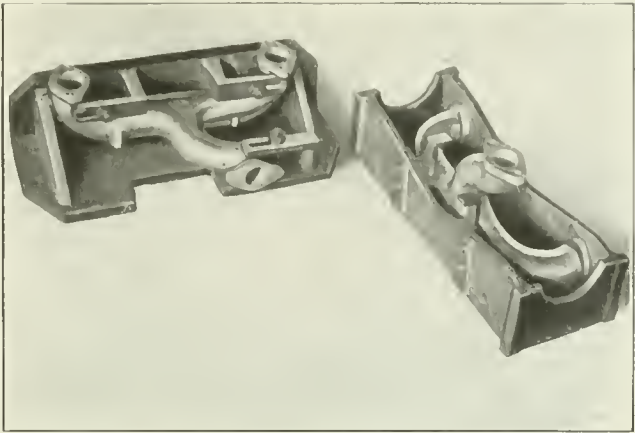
Milling and Drilling Jigs for the Intake Pipes
